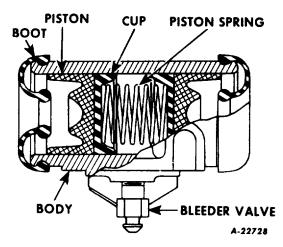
Typical Wheel Cylinder(Double-Piston Type)
